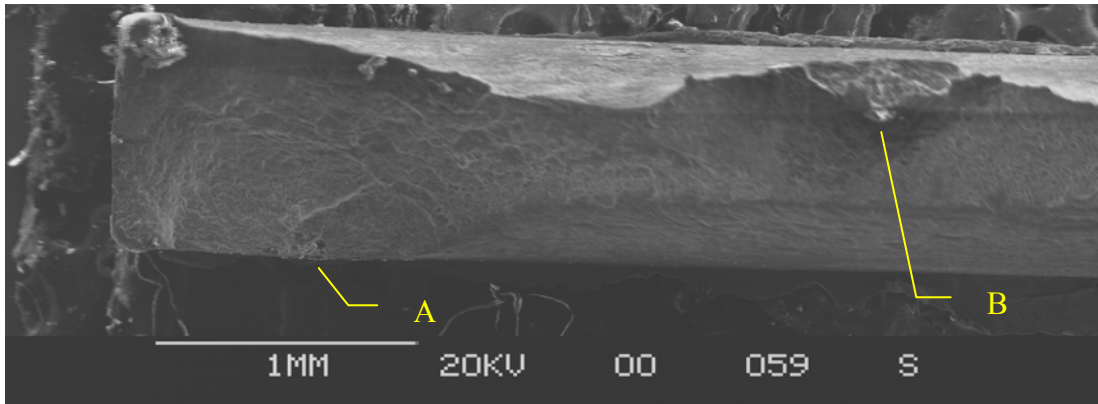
Fatigue Crack on Fracture Surface of Specimen 1331.
